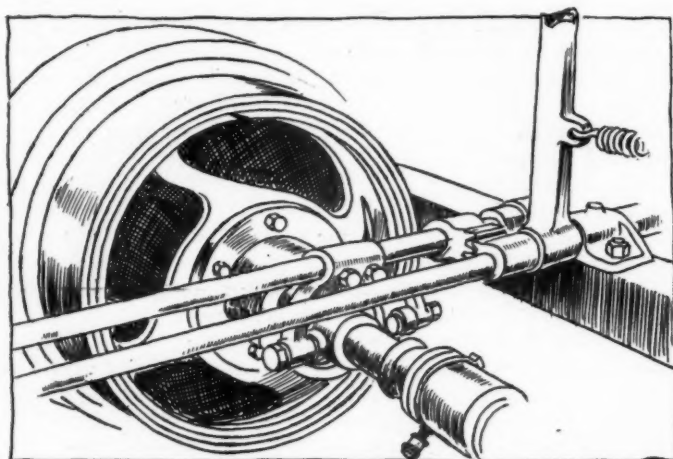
Clutch and brake rod intermeshed on D. P. F.
